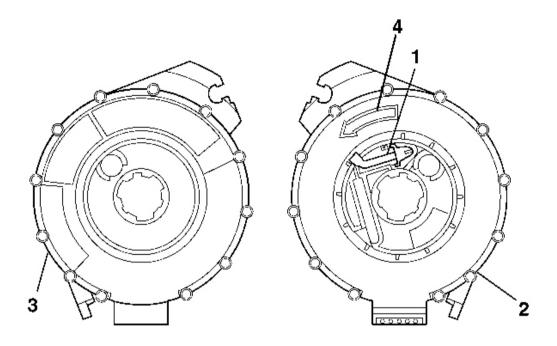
SIR Coil & No Centering Window, Spring Service Lock Courtesy of GENERAL MOTORS CORP.
